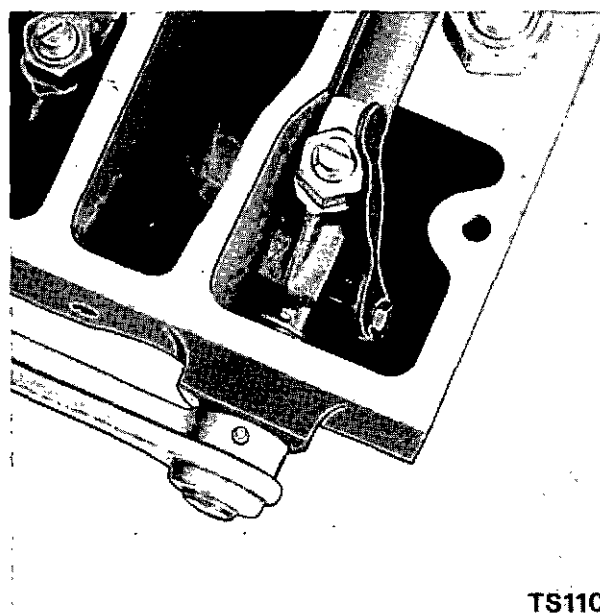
Decompressor Lever Dismantled (later engines)
